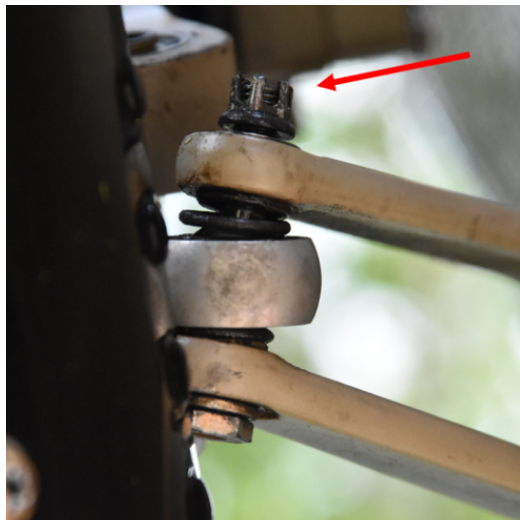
Pitch Change Lever Assembly. Red arrow points to loose nut on bolt; cotter pin was missing.
